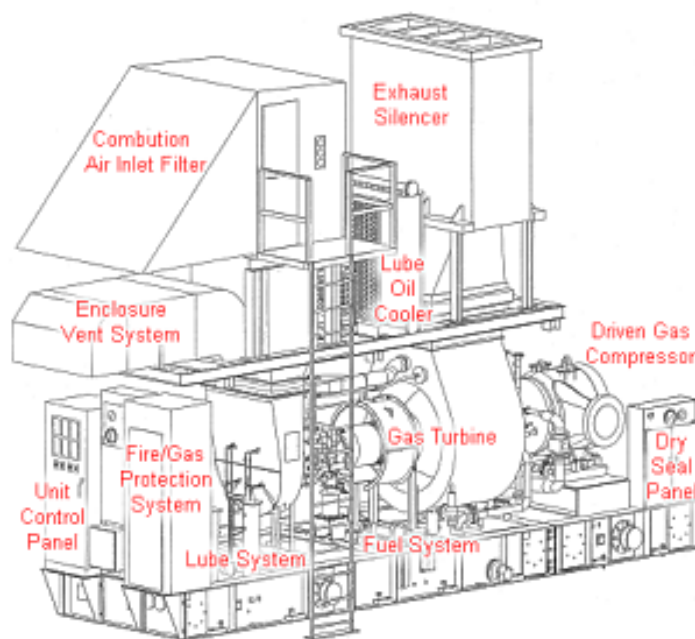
GAS TURBINE/COMPRESSOR PACKAGE
